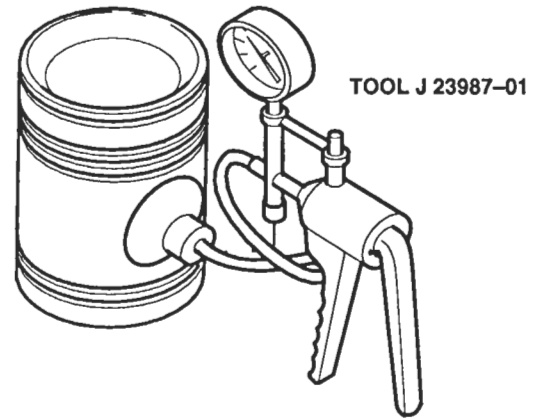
Checking Piston Pin Retainer for Proper Sealing
